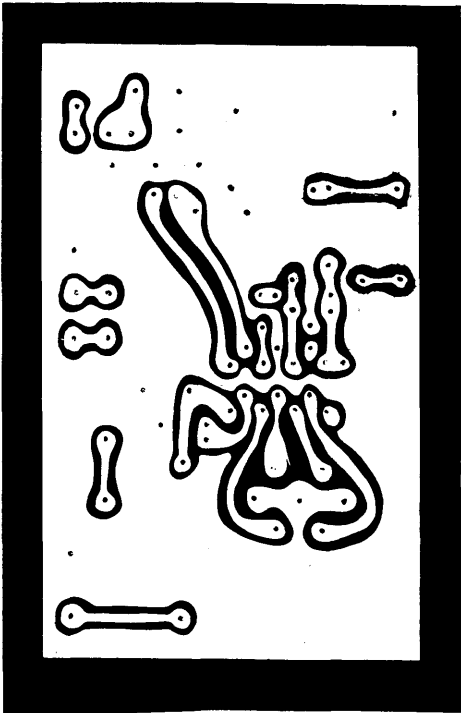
Recommended layout of printed-circuit board for TV-receiver sound strip utilizing RCA-CA3042. (Actual Size, Bottom View)
